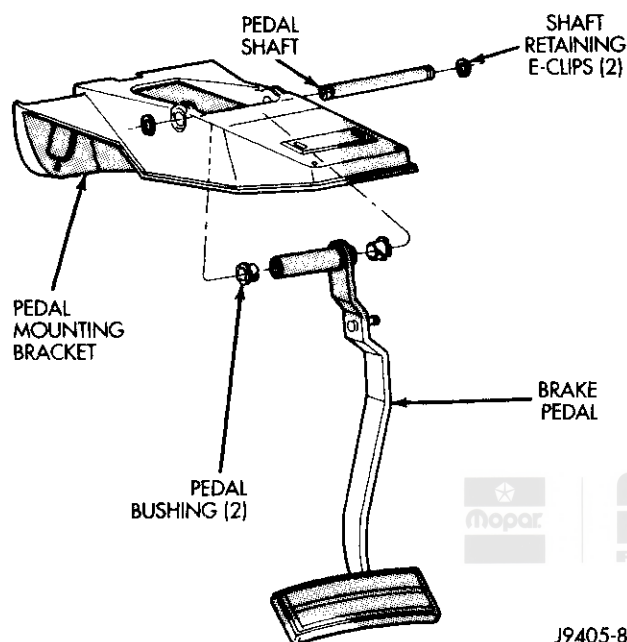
Brake Pedal Mounting (With Automatic Transmission)
